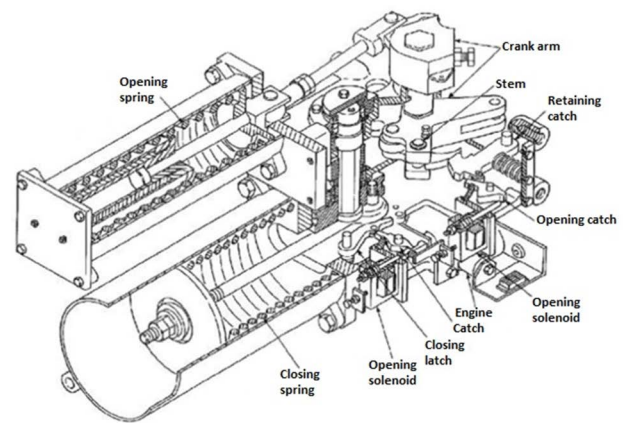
The pictorial drawing of a common drive for HV storage circuit breaker.
